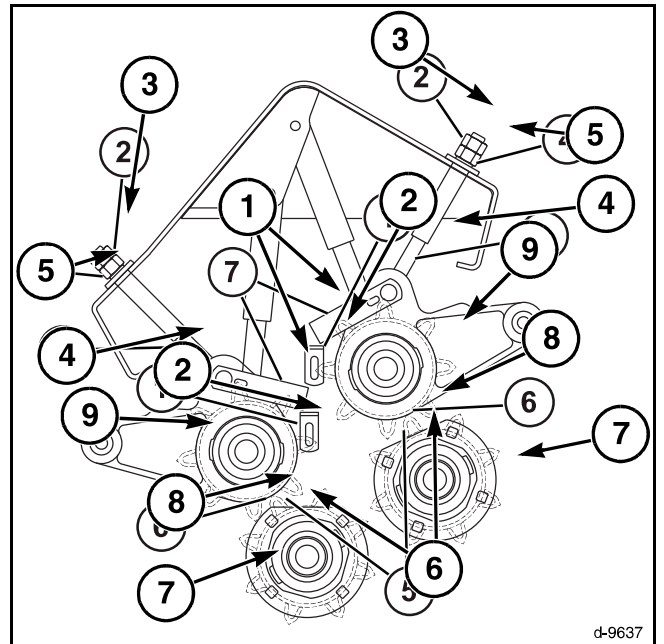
To reset the roll spacing indicator (1), loosen the nuts holding the roll spacing stops (2) on both sides of the machine.
